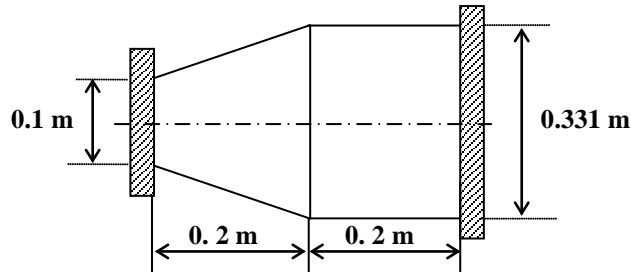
Geometric shape and dimensions of the combined conical-cylindrical shell in vacuo.
